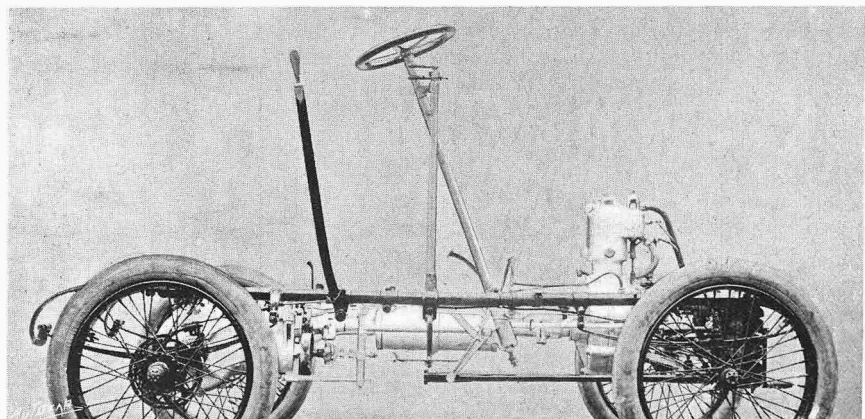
Elevation of chassis. This is the French type with wire wheels.
